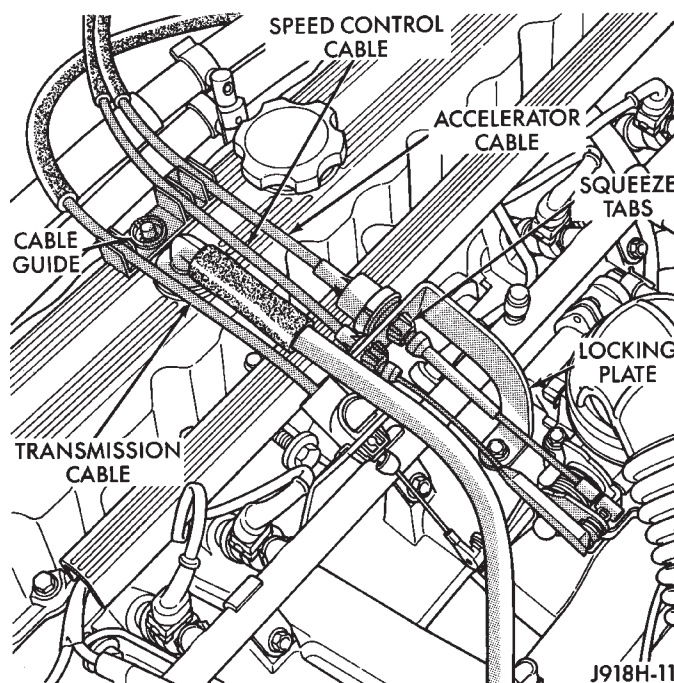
Remove/Install Speed Control Cable to Locking Plate
